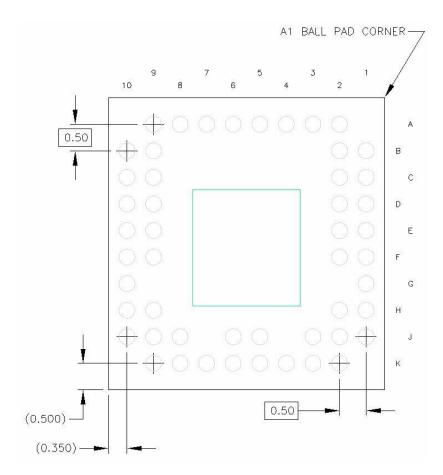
Physical layout of the A121 sensor, bottom view.
